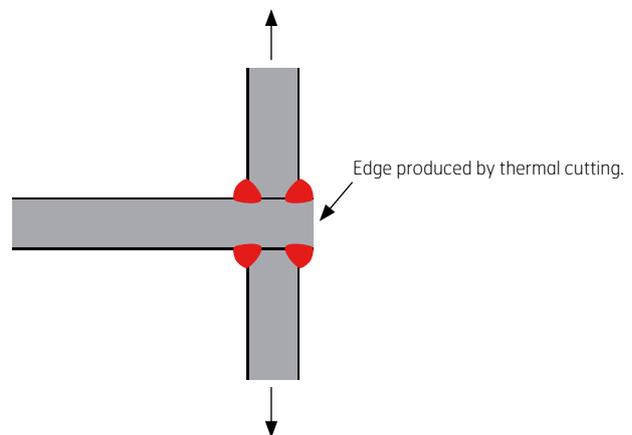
It is recommended to use thermal cut edges in T-joints with welds close to the cut edge.
